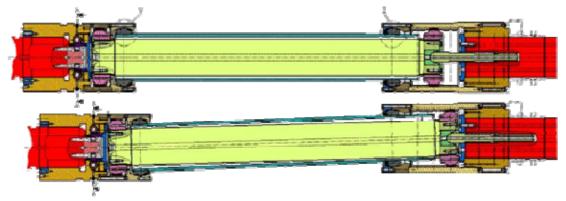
SIEFLEX® Cold Mill tube spindle with oil lubrication through pinion shafts
